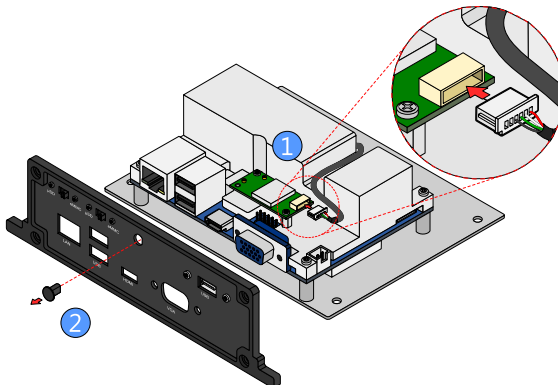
Connecting WLAN board-to-board cable and removing antenna hole cover
